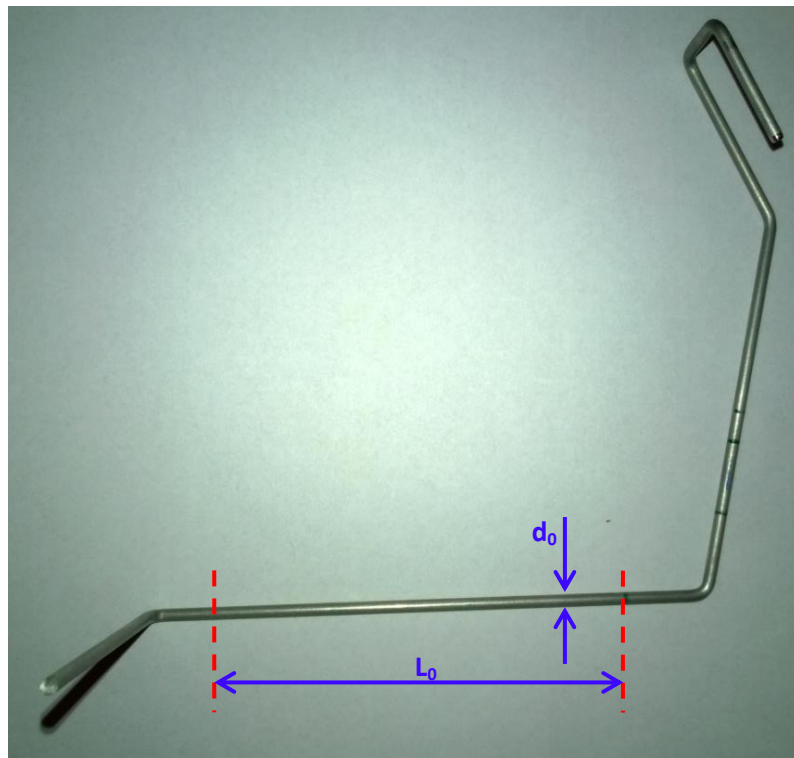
Dimensions of the specimen cut off from the wire arm.
